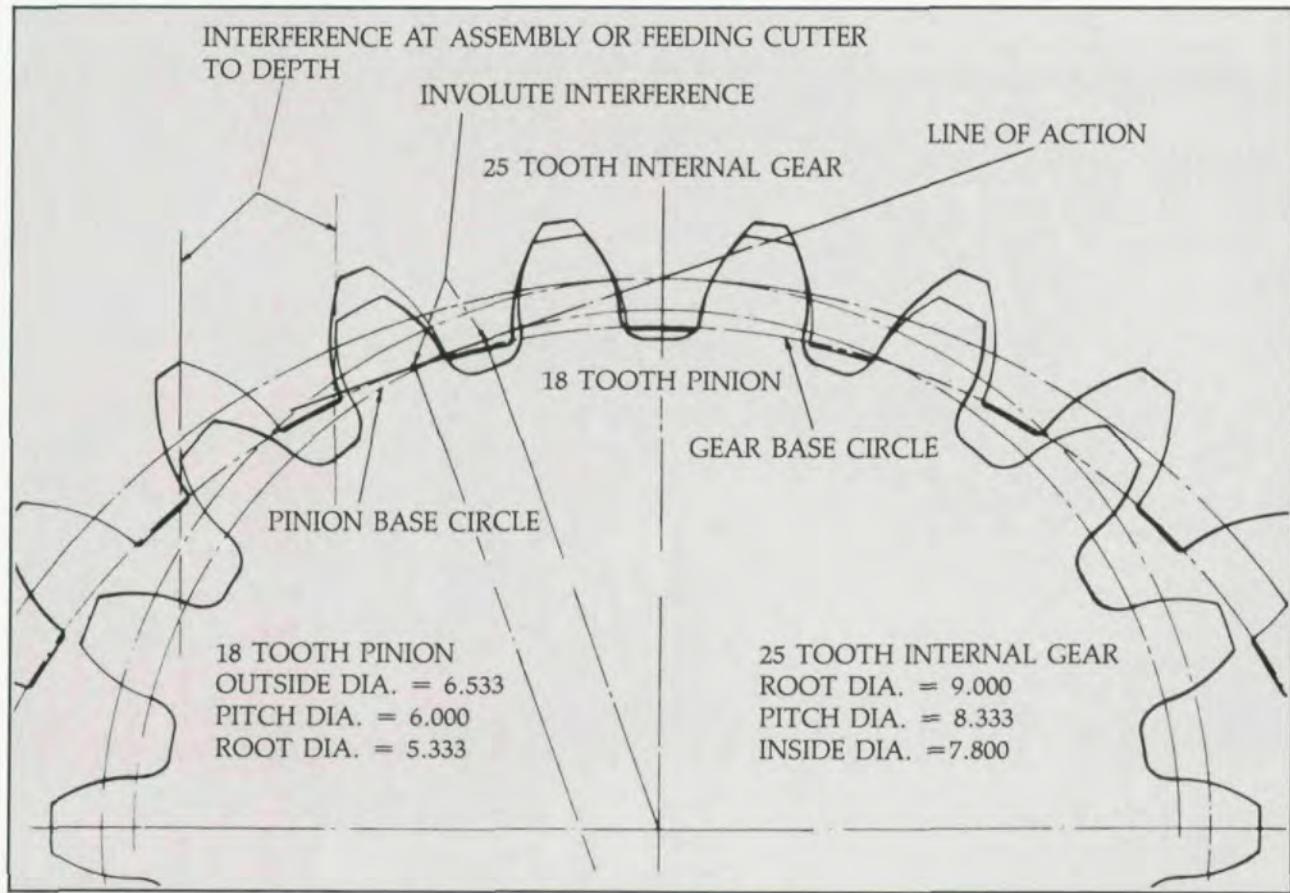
DP-20° Stub Tooth Form - Conventional Design
